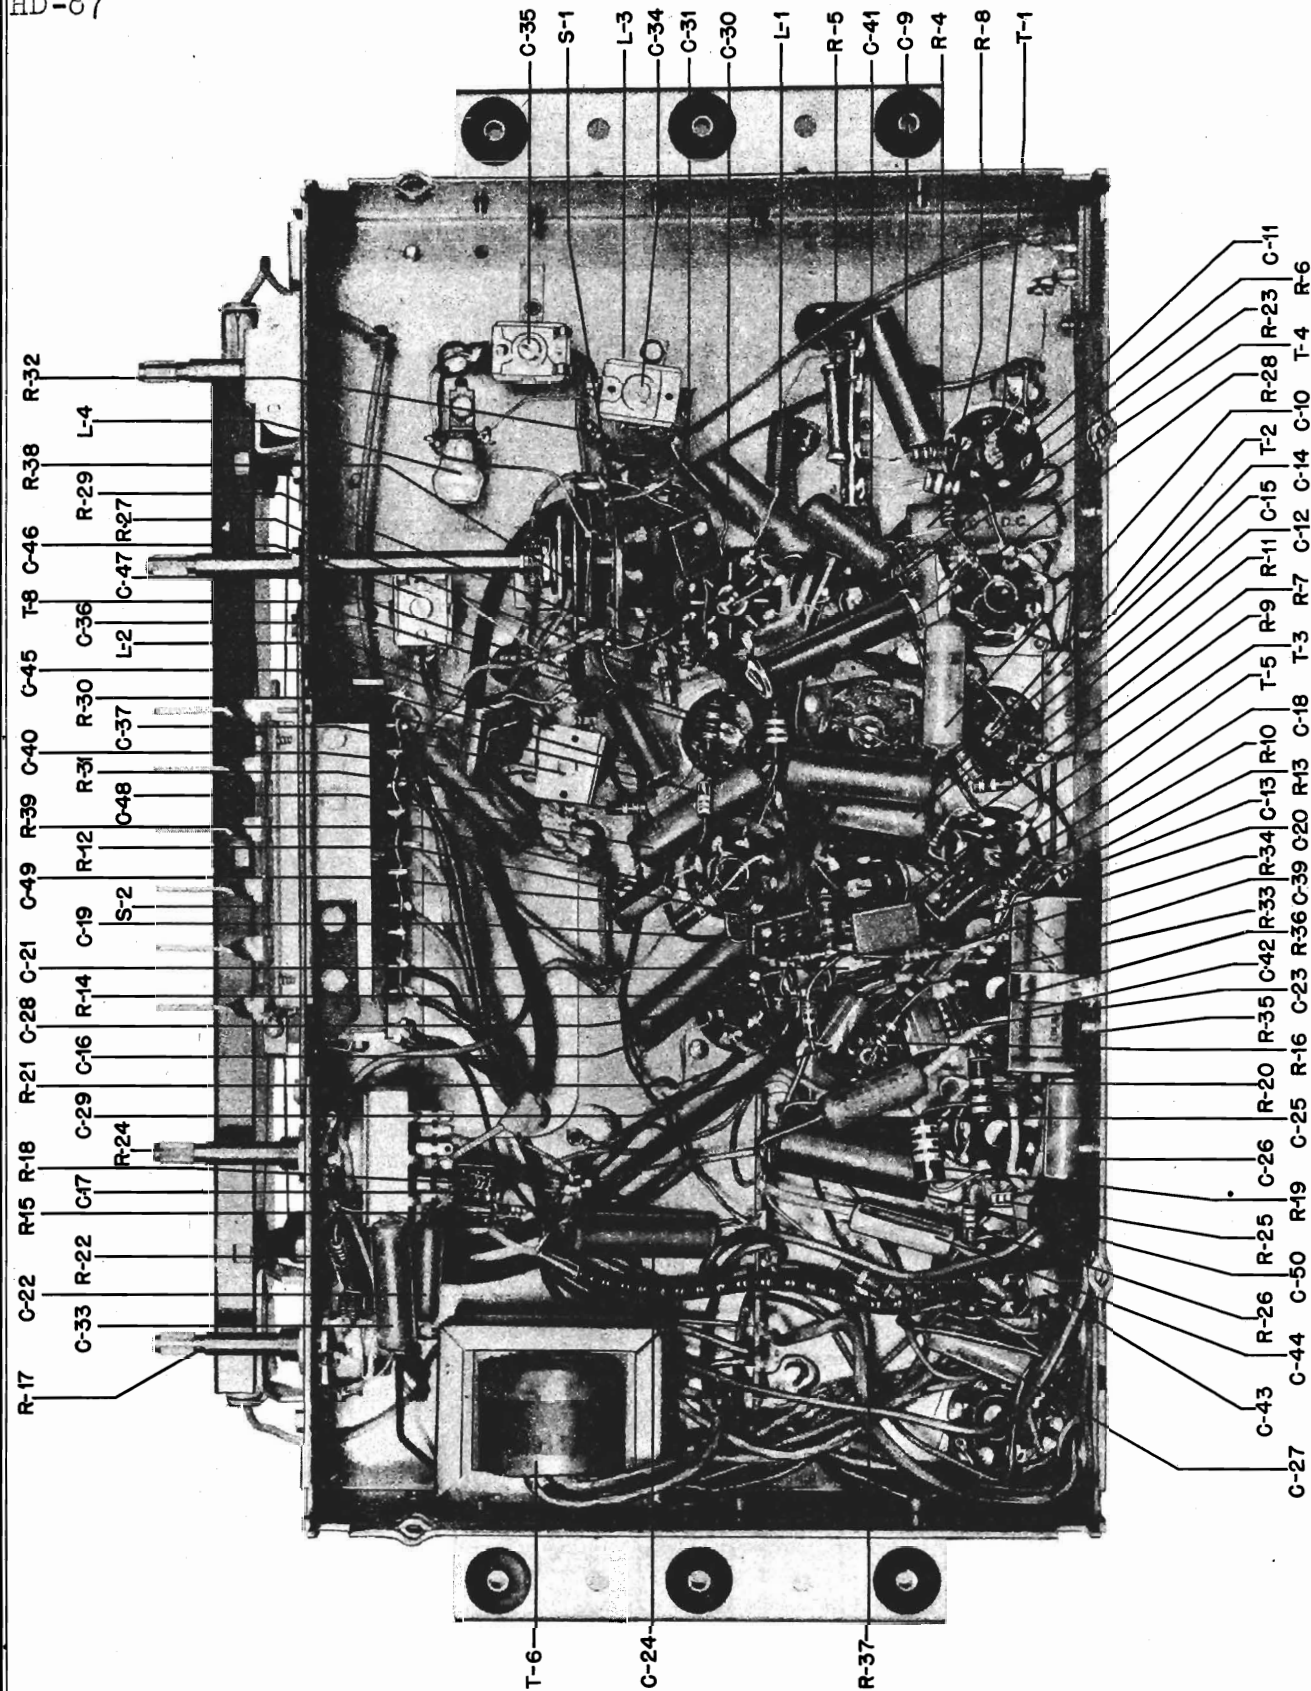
PARTS LOCATION - CHASSIS HS-87, BOTTOM VIEW
